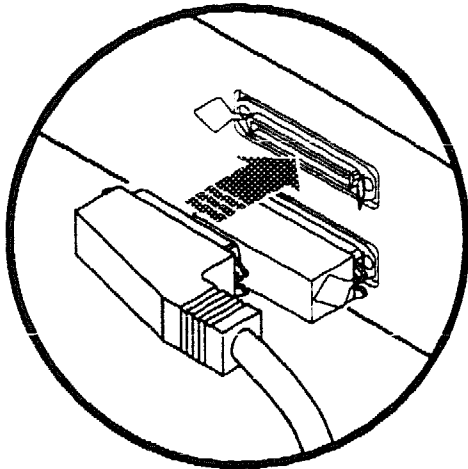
Connecting Terminator and Cable to BA440 External Drive
